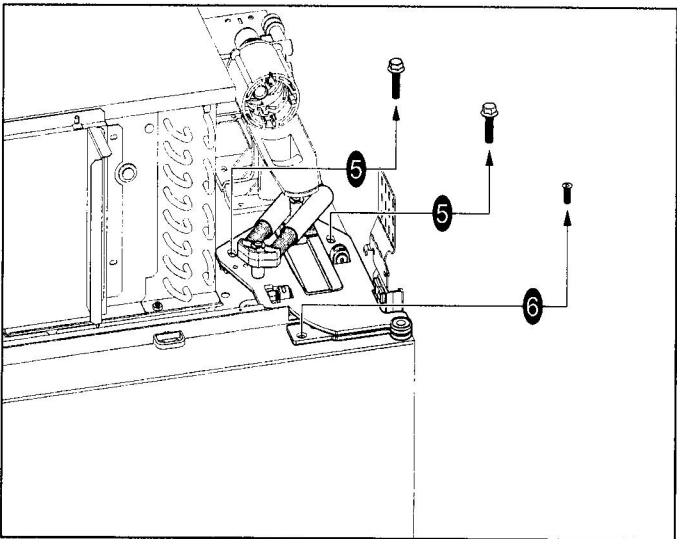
Cabinet Hinge Bolt Removal and Door Hinge Screw Removal
